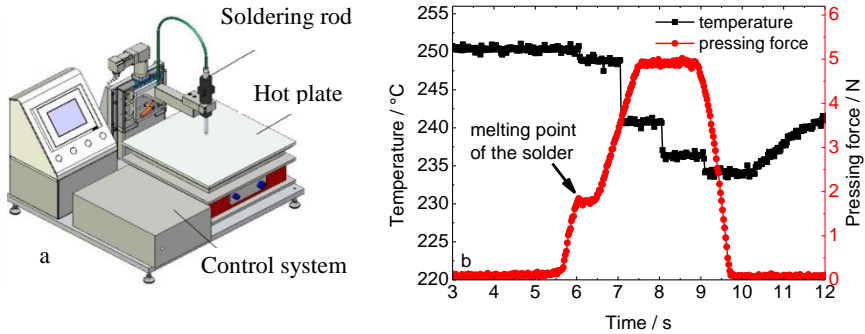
Semi-automatic soldering-station with a hotplate for pre heating and a controllable soldering rod (a) and a diagram of the precise adjustable soldering temperature (red circles) and the soldering force (black squares) over the soldering time (b)
